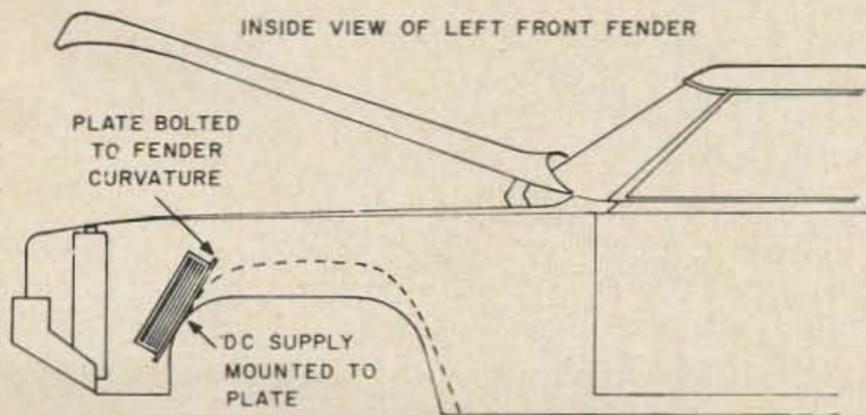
Power supply mounted against metal car body for maximum heatsinking.
